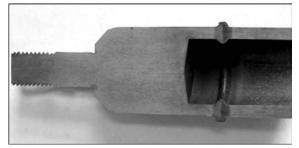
Macrosection (×1) of welded joint of left steering rod
